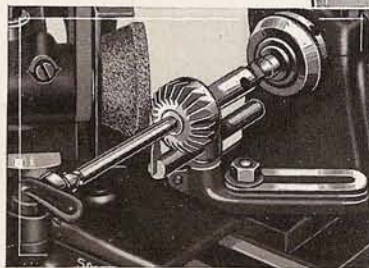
At Right—Sharpening a Valve Seat Reamer in the Lathe.
